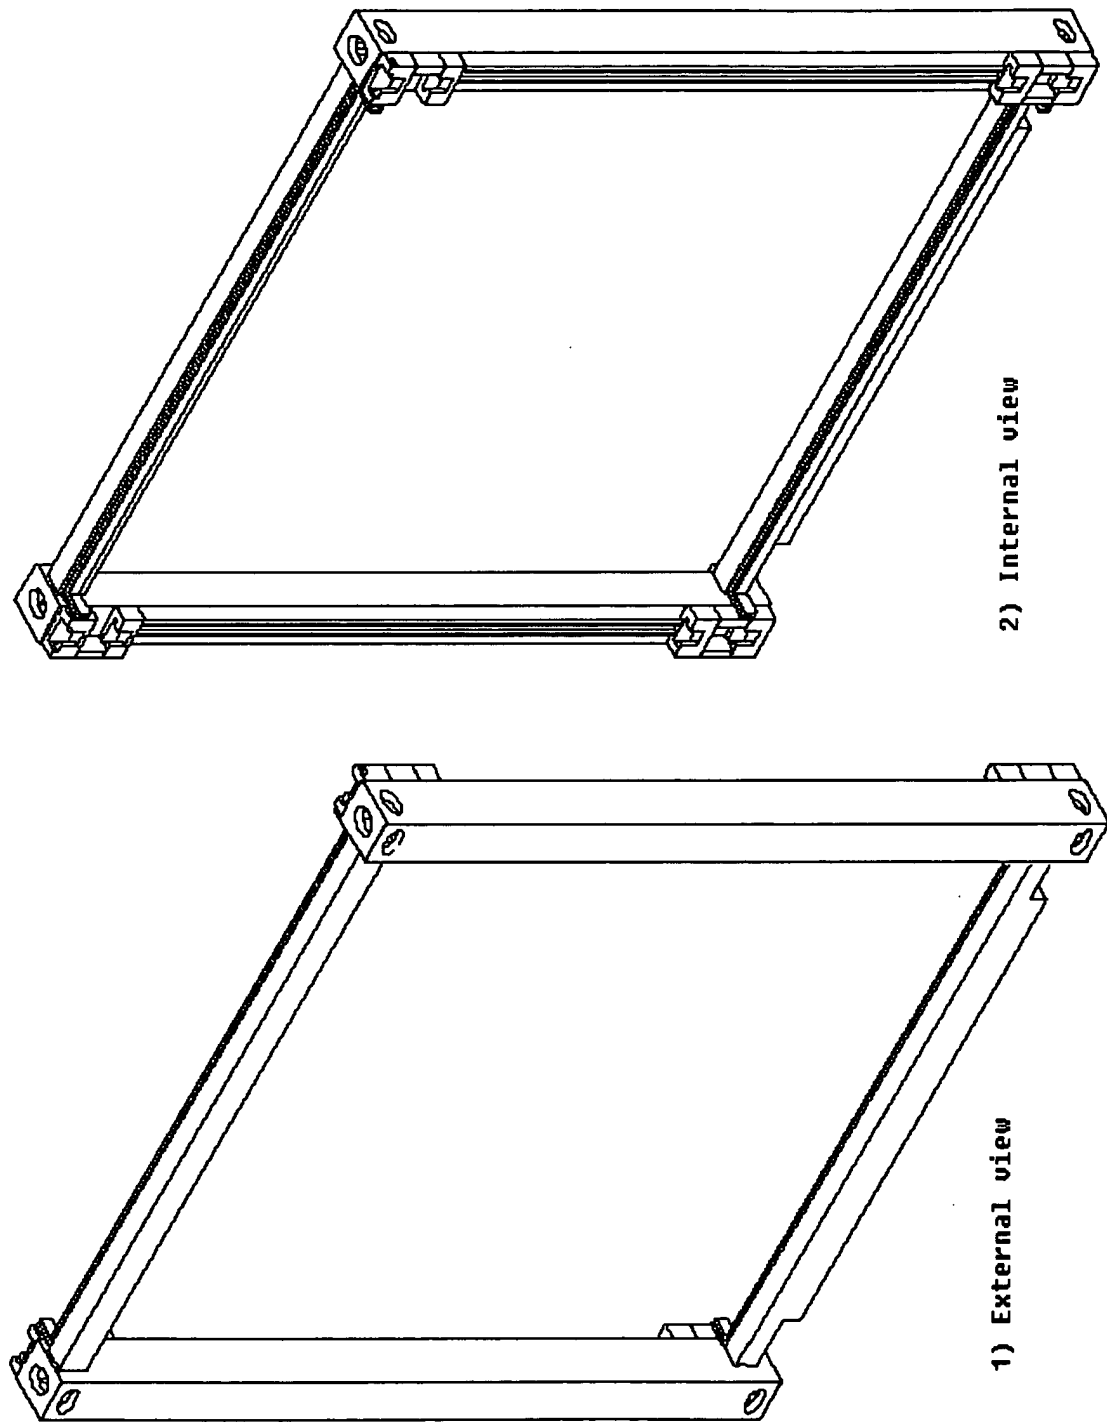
C: Isometric views of a left frame (20 foot collapsible cargo container)
